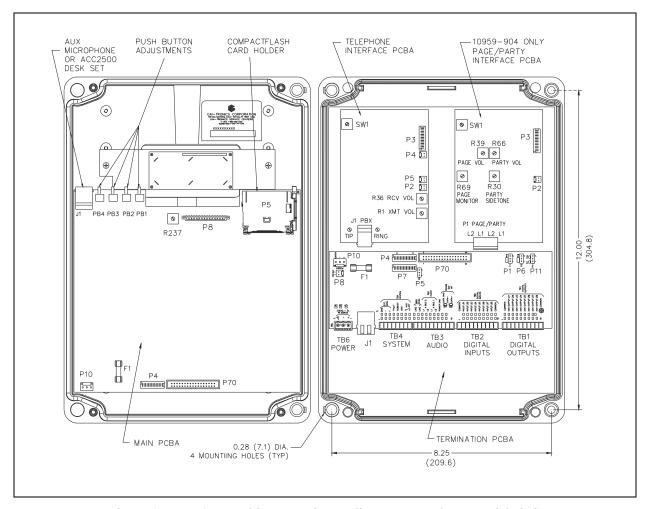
AMI (open with connections, adjustments, and PCBAs labeled)
